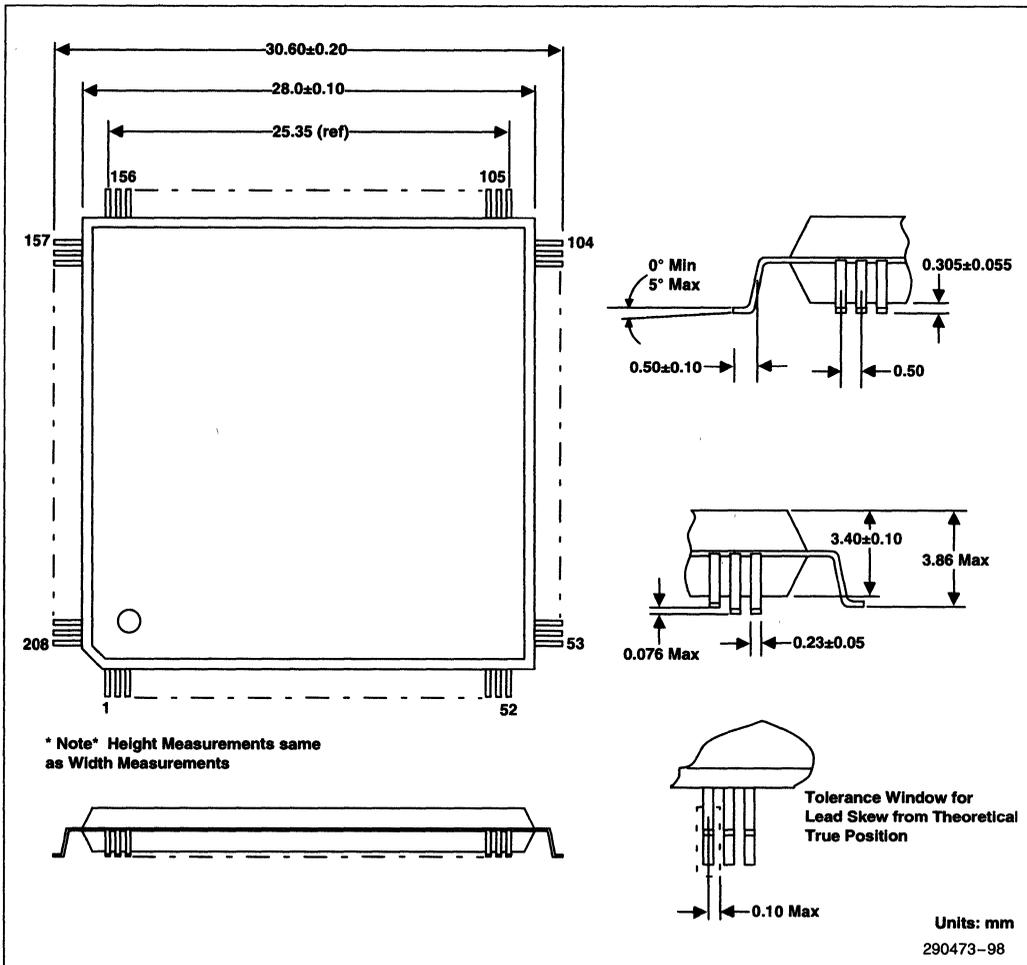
208-Pin Quad Flat Pack (QFP) Package Dimensions
